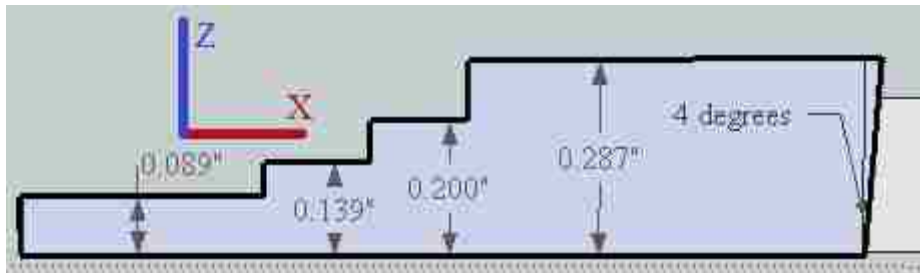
Cross sectional view of the 10x10 cm² middle trimmer lead plate illustrating the thickness values of the plate. The middle trimmer is square, such that all non-hole dimensions are equal in the in-plane and cross-plane dimensions.
